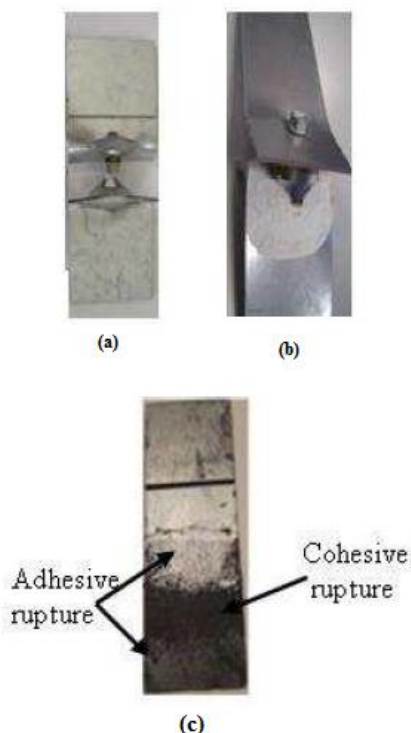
failure for the joints with shear configuration: riveted joint (a), screwed joint (b), bonded joint (c)
